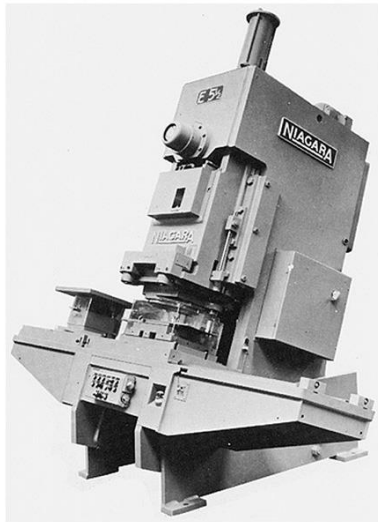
(Left) Inclinable gap-frame press with sliding bolster to accommodate two die sets for rapid change of tooling. (Courtesy of Niagara Machine & Tool Works, Buffalo, NY.)
